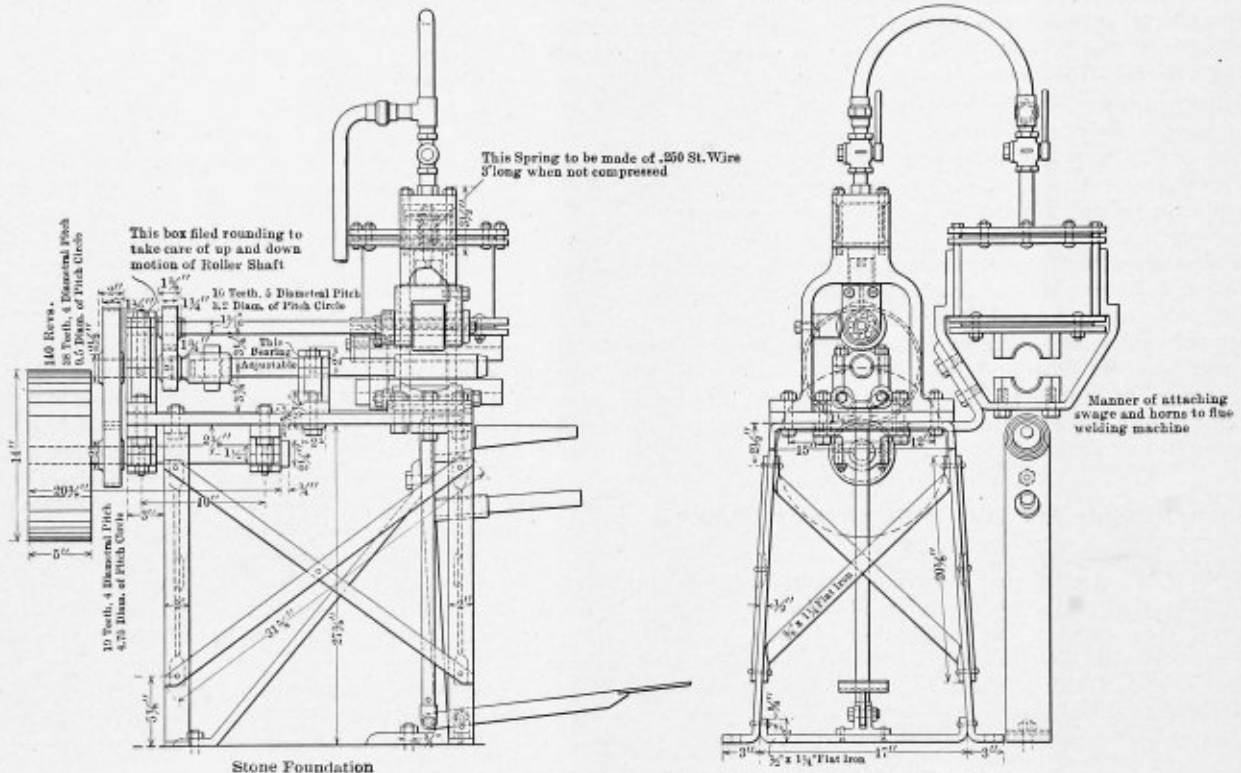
FLUE-WELDING MACHINE IN USE AT THE SUNBURY SHOPS OF THE PENNSYLVANIA RAILROAD.
